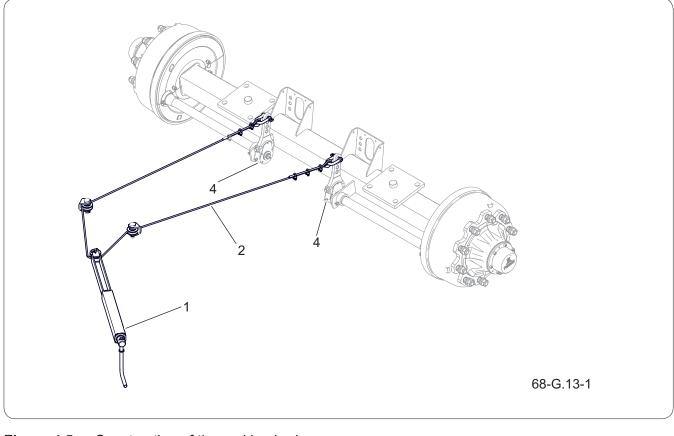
Construction of the parking brake(1) brake mechanism(2) cable(4) expander lever
